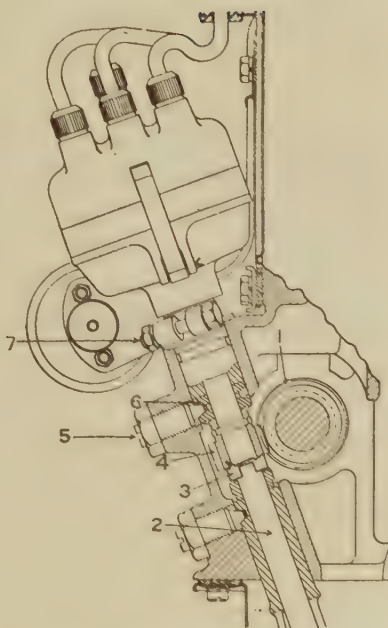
A Vauxhall Distributor Unit and its Drive.
